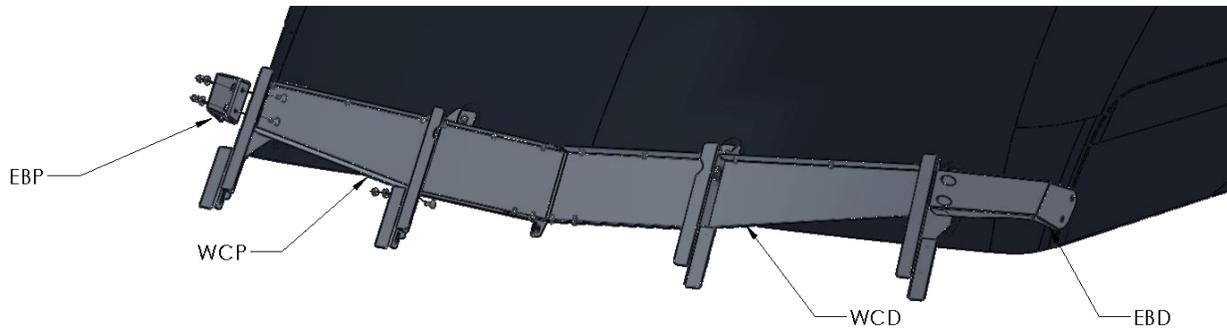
Driver/Passenger Wire Covers and Ear Brackets, shown from front view
